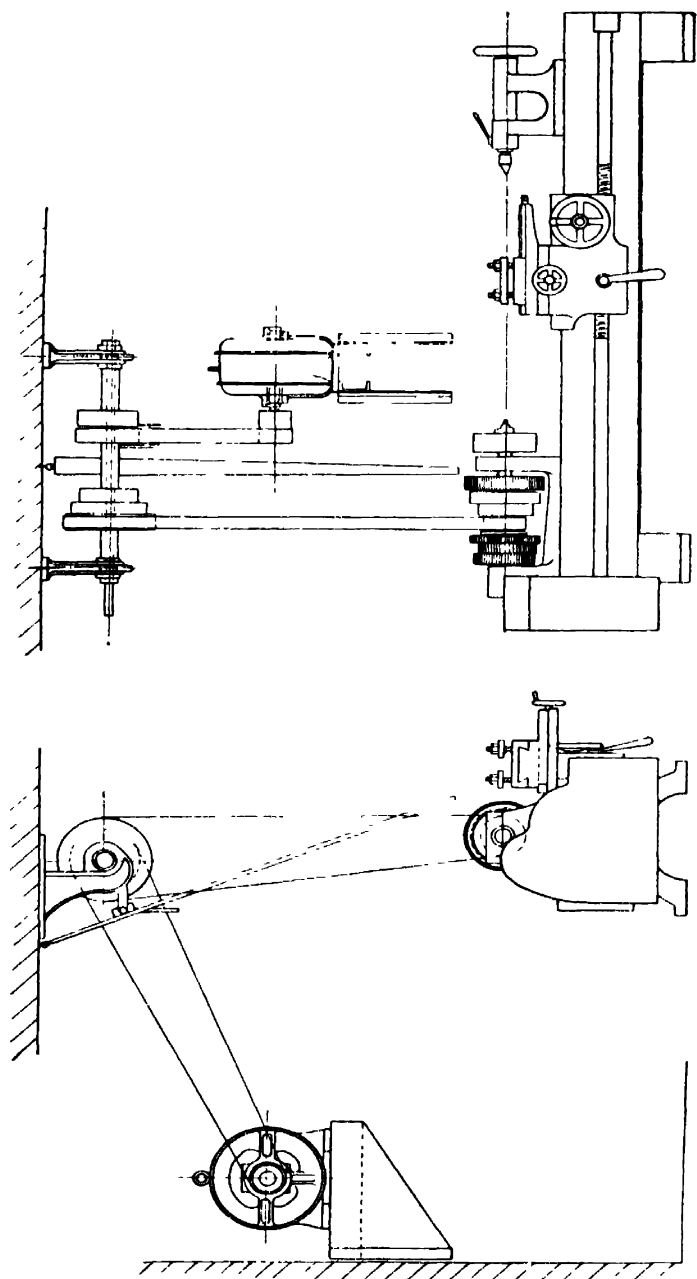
MOTOR DRIVING LATHE THROUGH SHAFT AND BELTING
